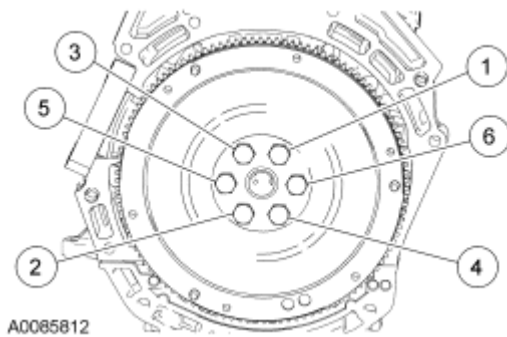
Identifying Flexplate Bolts Tightening Sequence
